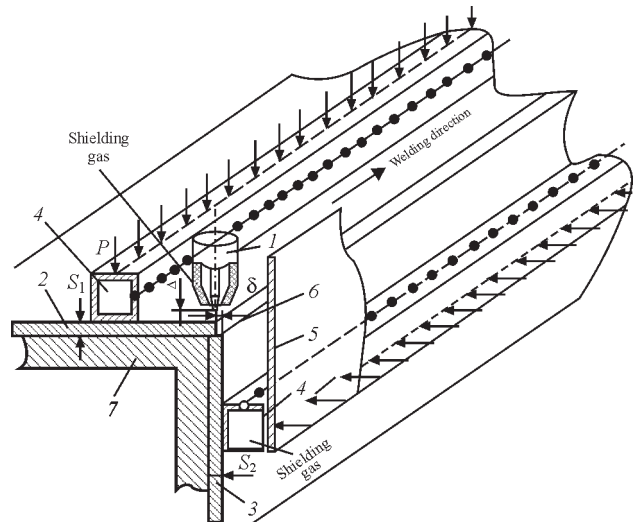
Scheme of moving welding torch along the butt: 1 — welding torch; 2, 3 — semi-products to be welded; 4 — gas channel for protection of the outer side of the workpiece; 5 — protective screen; 6 — gas channel for protection of the back side of the workpiece weld; 7 — force part of rigging
